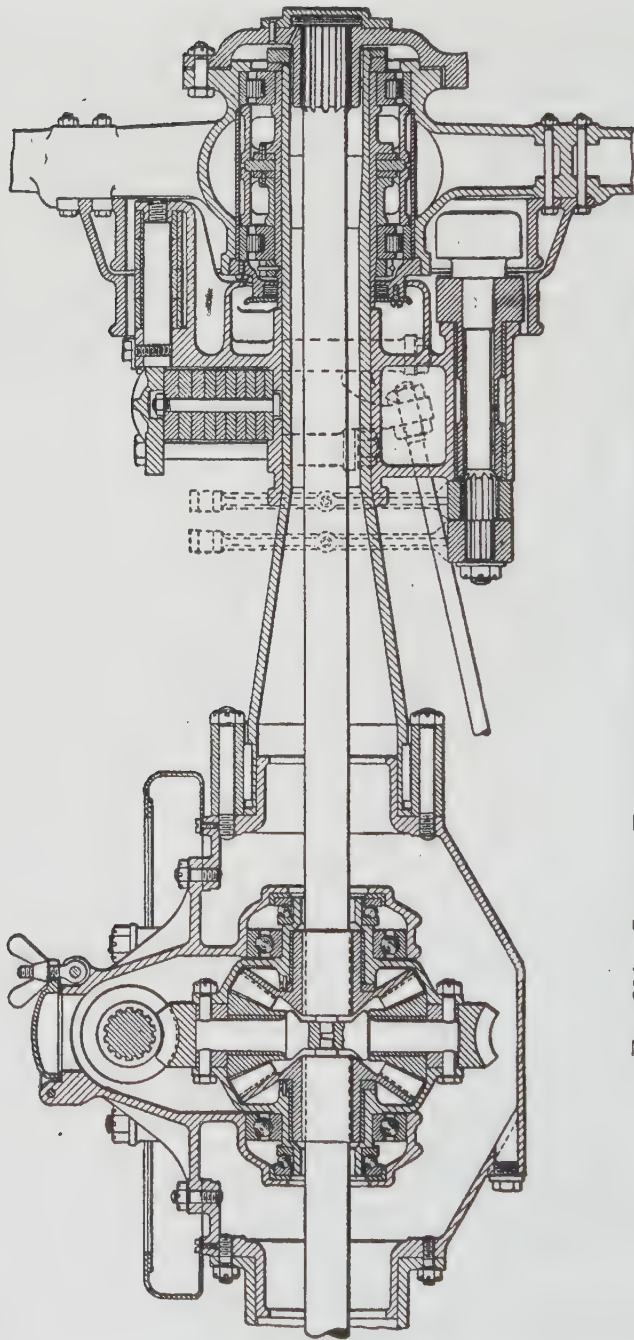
SECTION THROUGH DAIMLER WORM-DRIVEN BUS AXLE.
